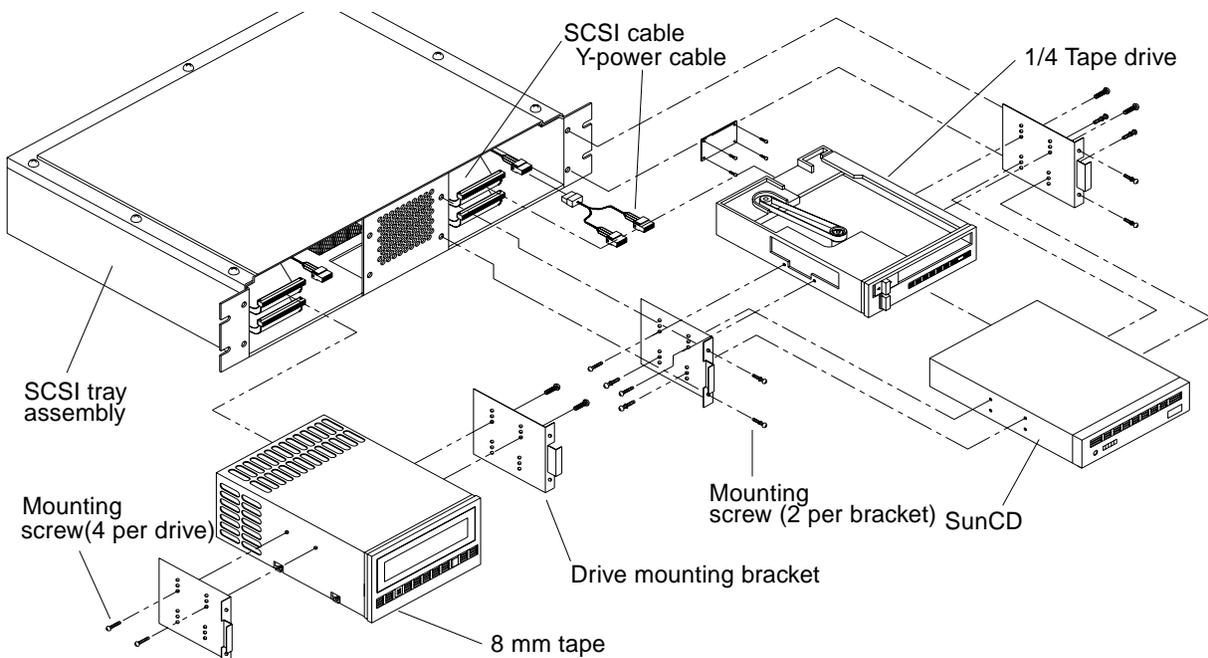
Combined Drive/ 8 mm Tape Removal and Replacement
